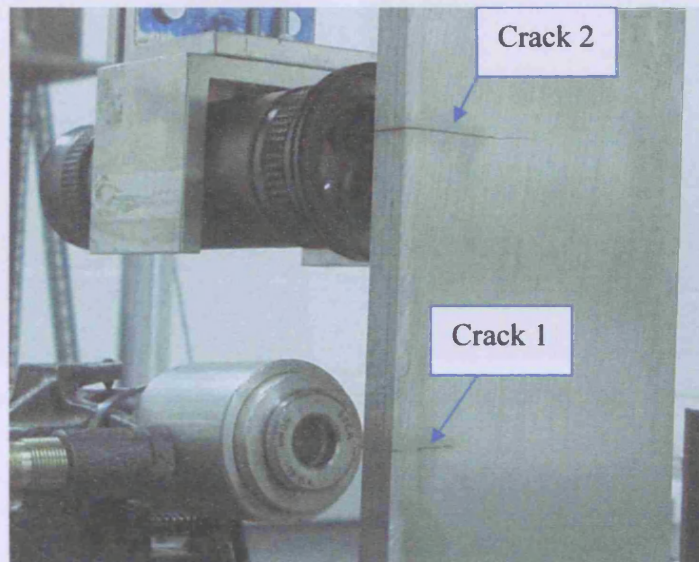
Two edge cracks of Test 6 specimen during fatigue testing.
